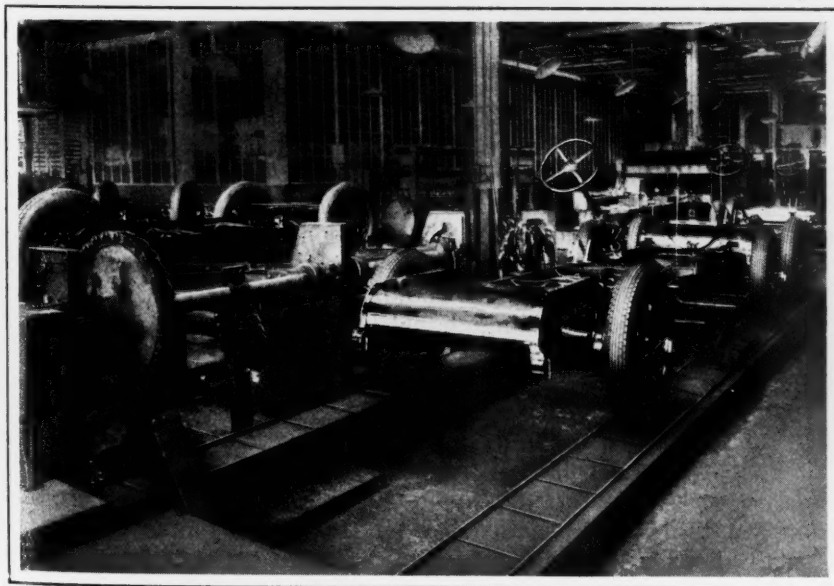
The End of the Chassis Assembly Line just Beyond the Inspection Pit
